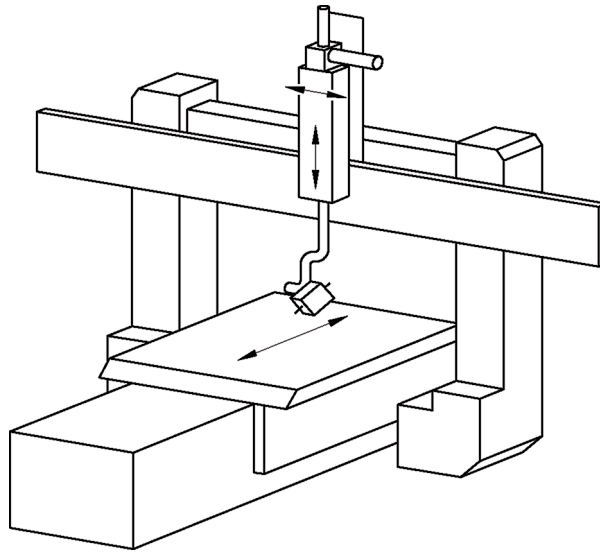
Example of a machining centre with moving table, fixed portal, moving machining head
